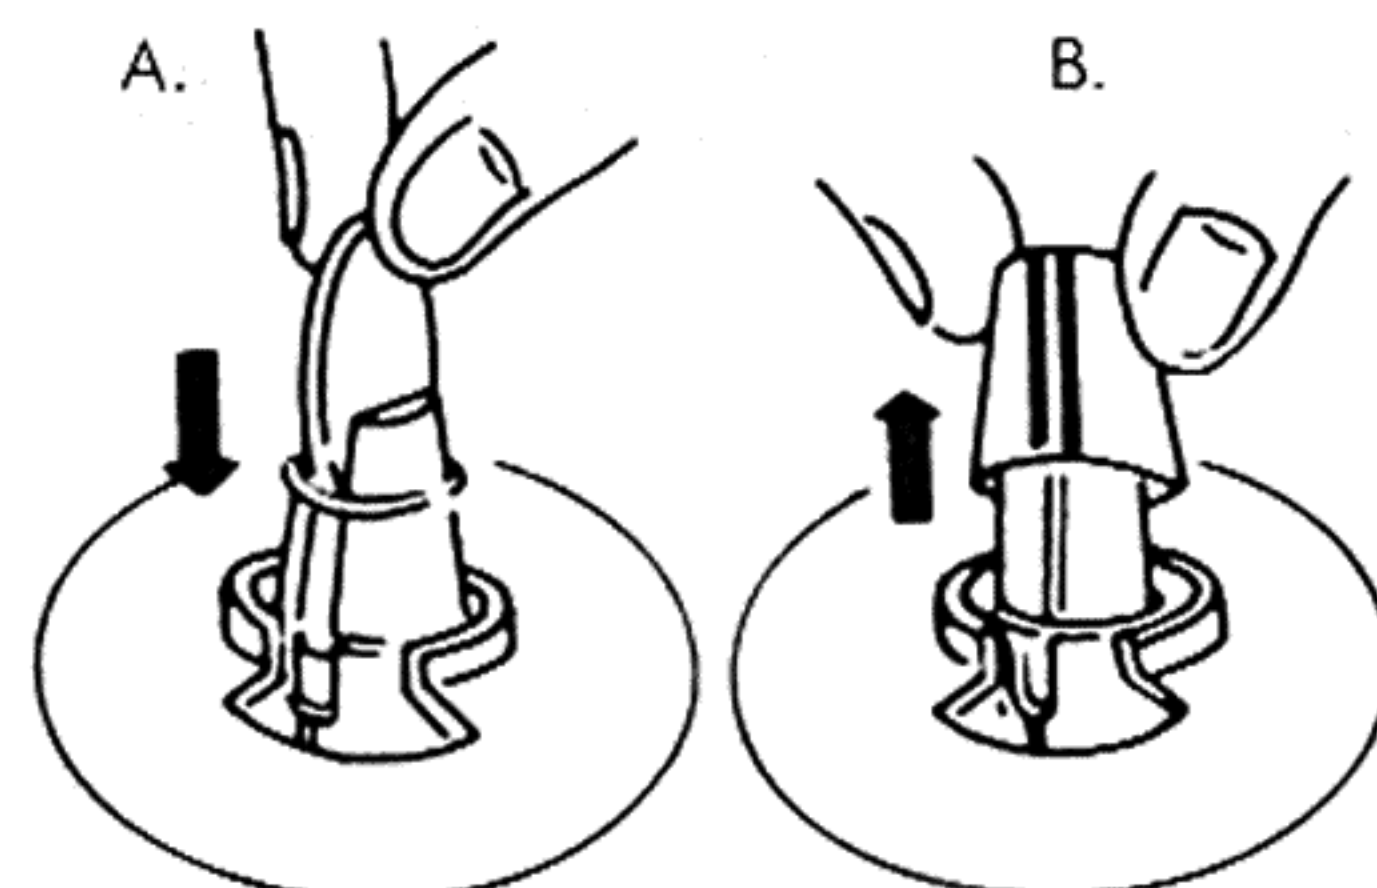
Cone for inserting and removing spring-clip for securing platter to chassis.
